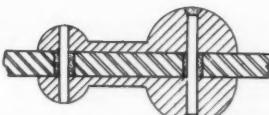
The parts are assembled on both sides of the match plate, the dowels being in a solder filling in the plate and on the ends (at right) and filed smooth (at left)
